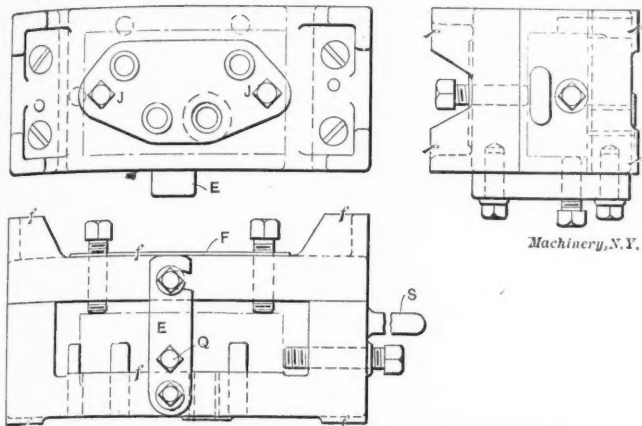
Jig Improved by adding Feet Opposite Faces containing Drill Bushings.
